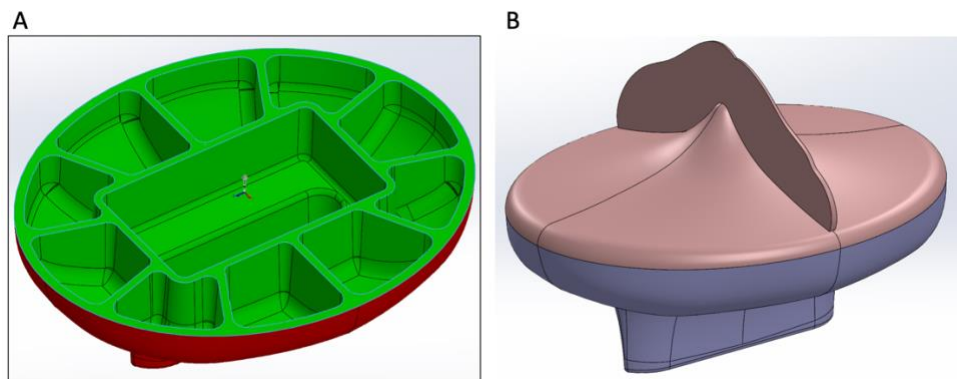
(A) Draft analysis of velella bottom mold master. The solid green color on internal features shows an appropriate removal draft for casting. (B) Final version of bottom and top form factor
